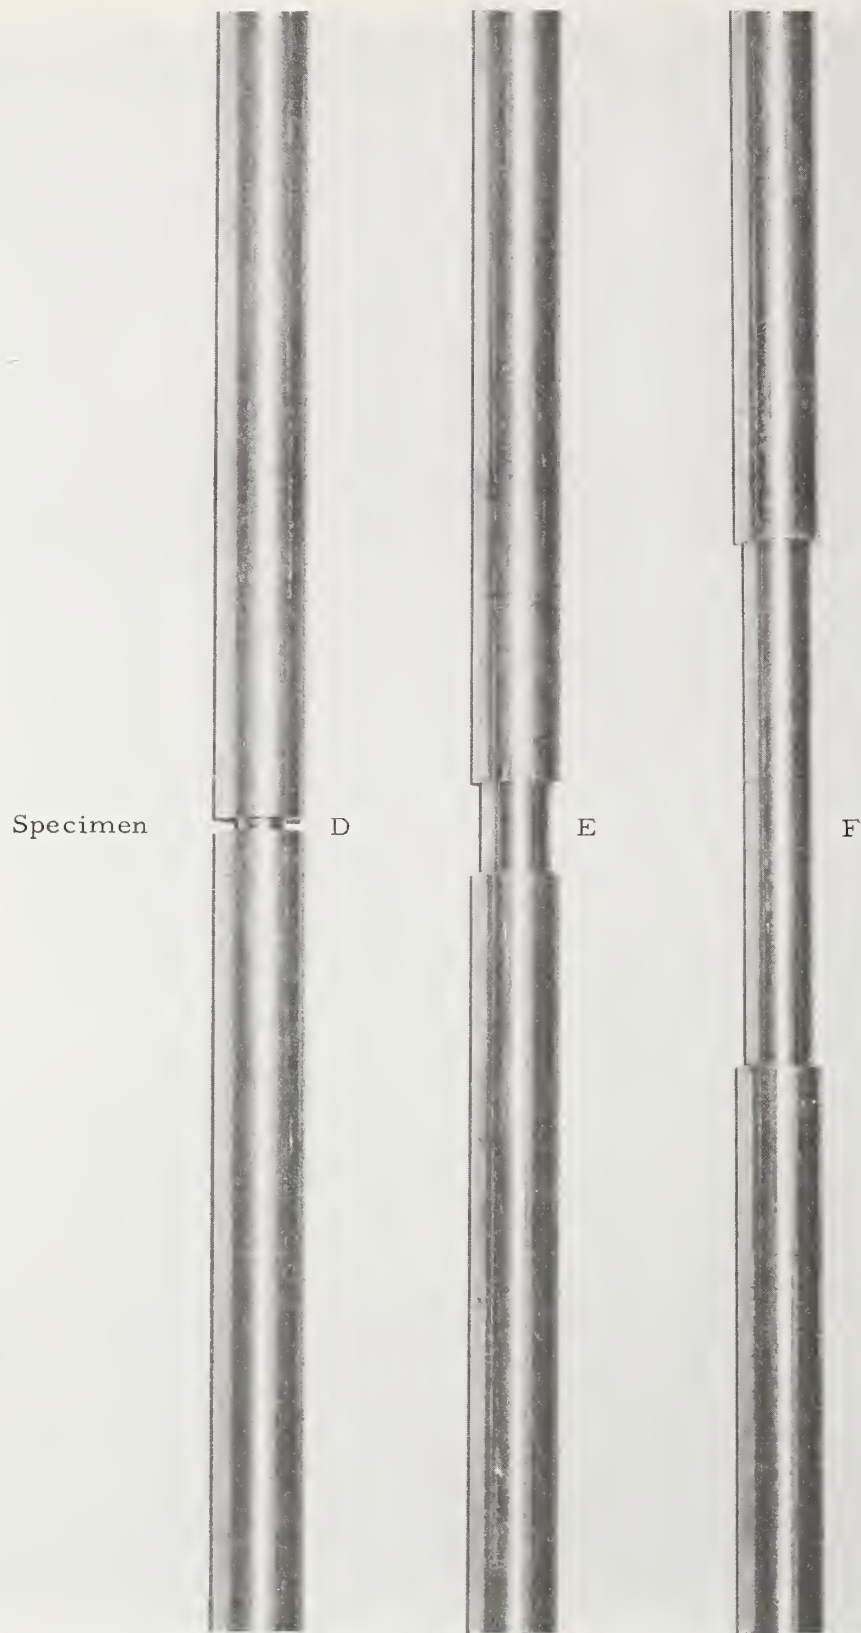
CLOSEUP VIEW OF CRS BAR SPECIMENS WITH MANUFACTURED FLAWS
